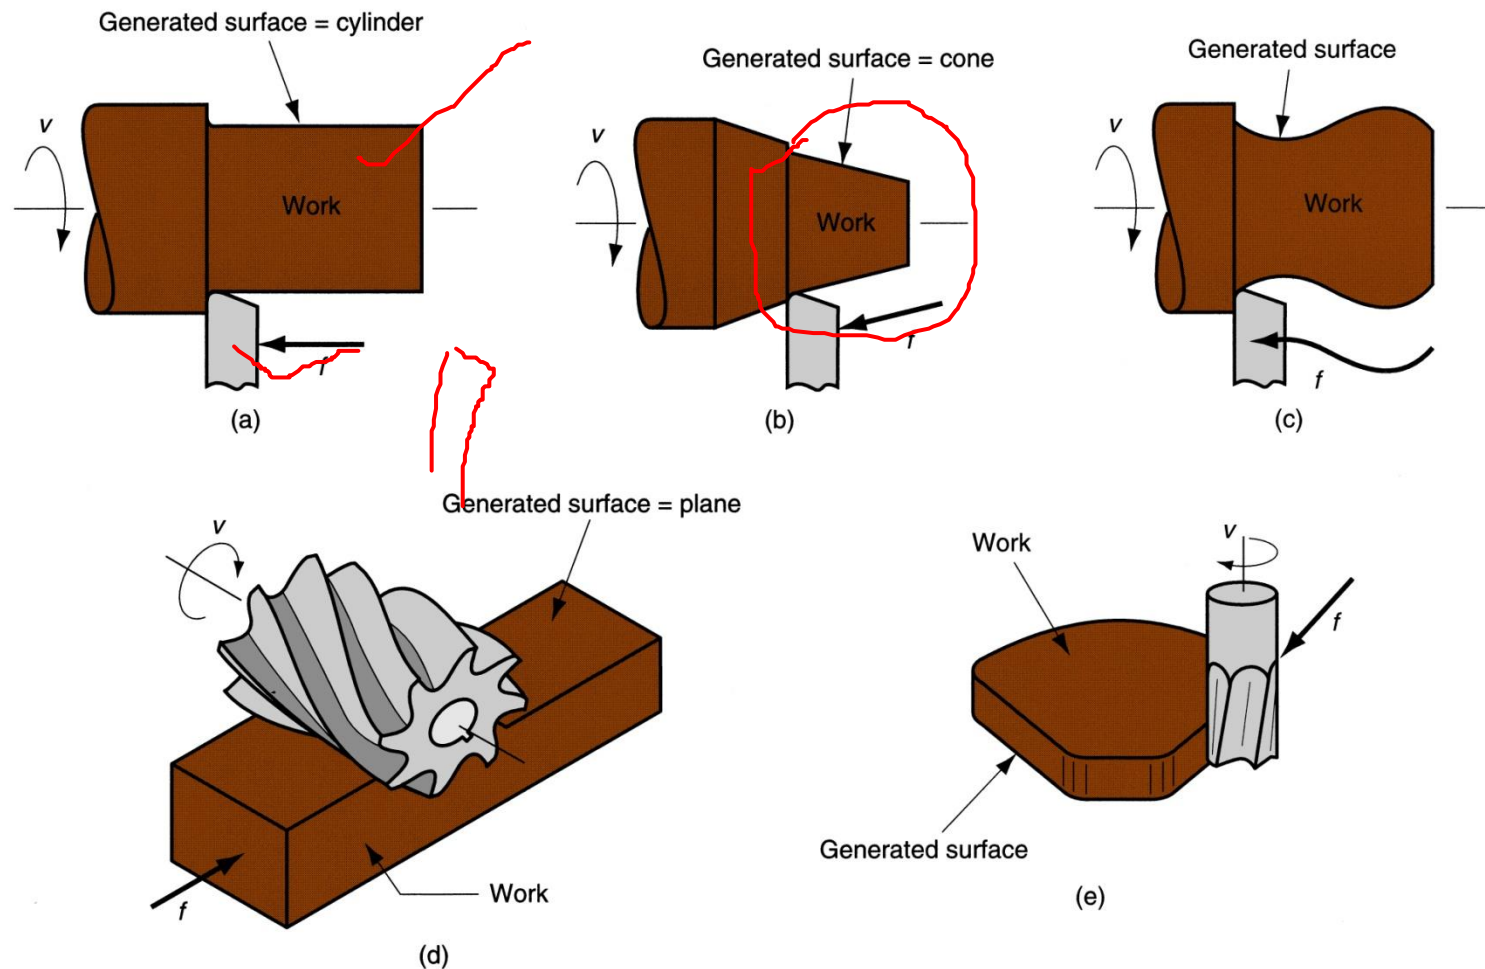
Generating shape: (a) straight turning, (b) taper turning, (c) contour turning, (d) plain milling, (e) profile milling
